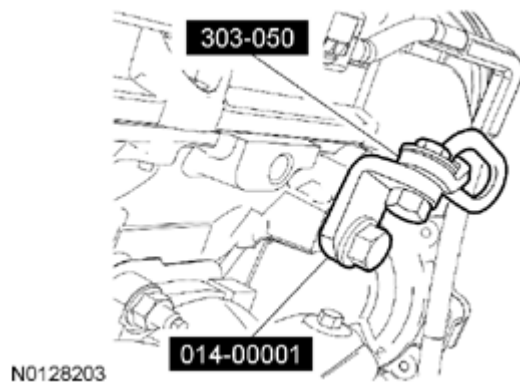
Installing Adjustable Grip Arm And Engine Lifting Bracket
